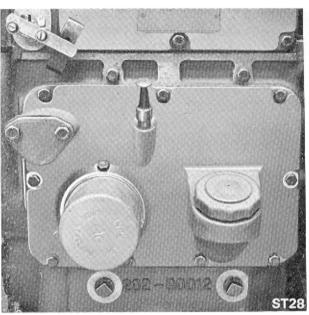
Crankcase Door with Dipstick and Filler Cap—ST
